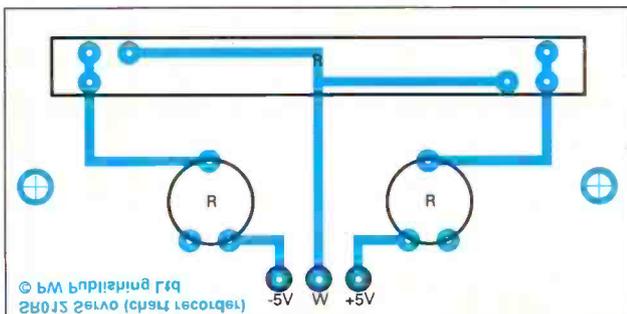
Full size printed circuit board layout and copper track pattern for the main board.
